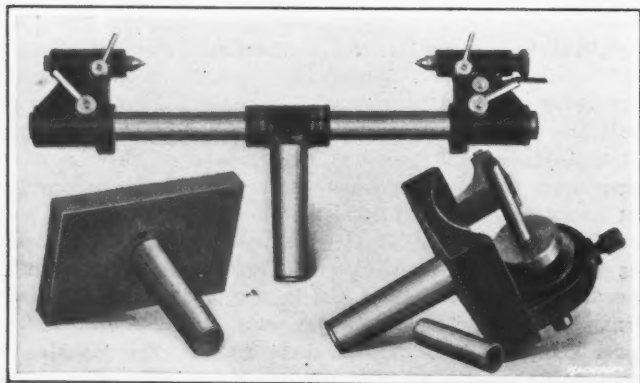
Attachments for testing Concentricity of Milling Cutters and of Cylindrical Work
